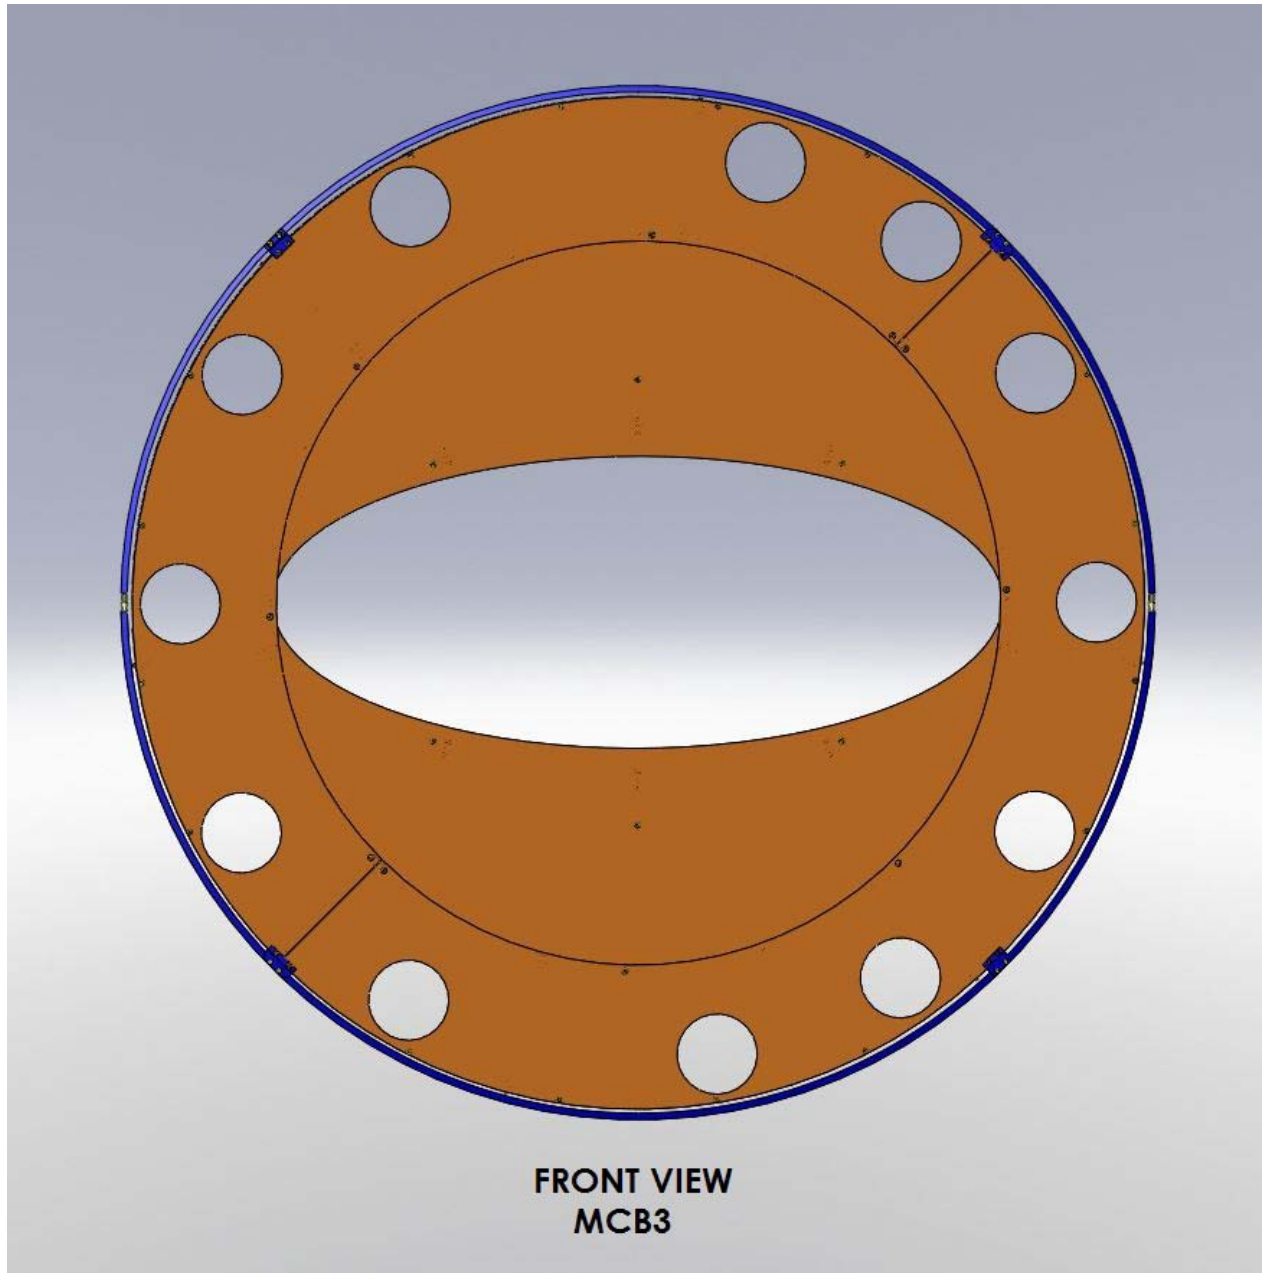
Front View of MCB3 Mode Cleaner Tube Baffle
